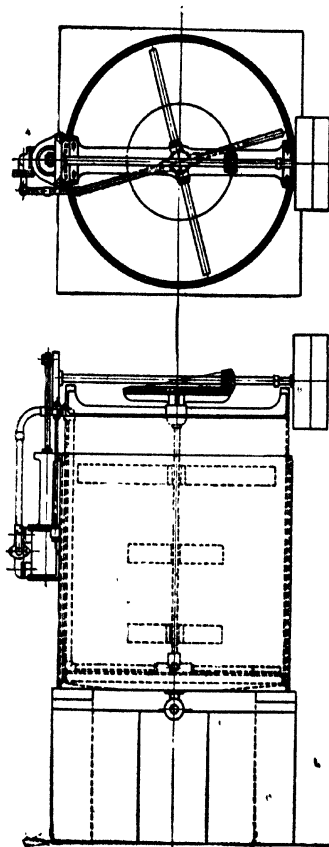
The Craig extractor for extracting oils, fats, etc. Section of linseed oil boiler (A. F. Craig & Co., Ltd., Paisley).
